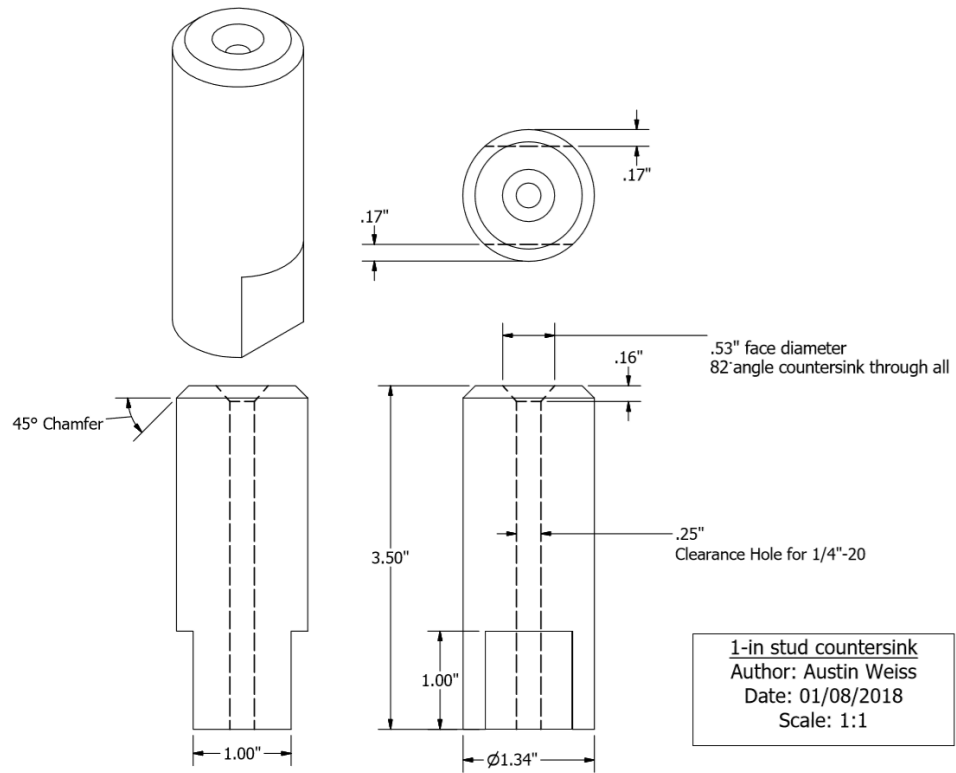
Custom aluminum slug mount for fastening anemometers. Chamfers were cut for ease of mounting and filets so that a wrench could grip the slug for tightening.
